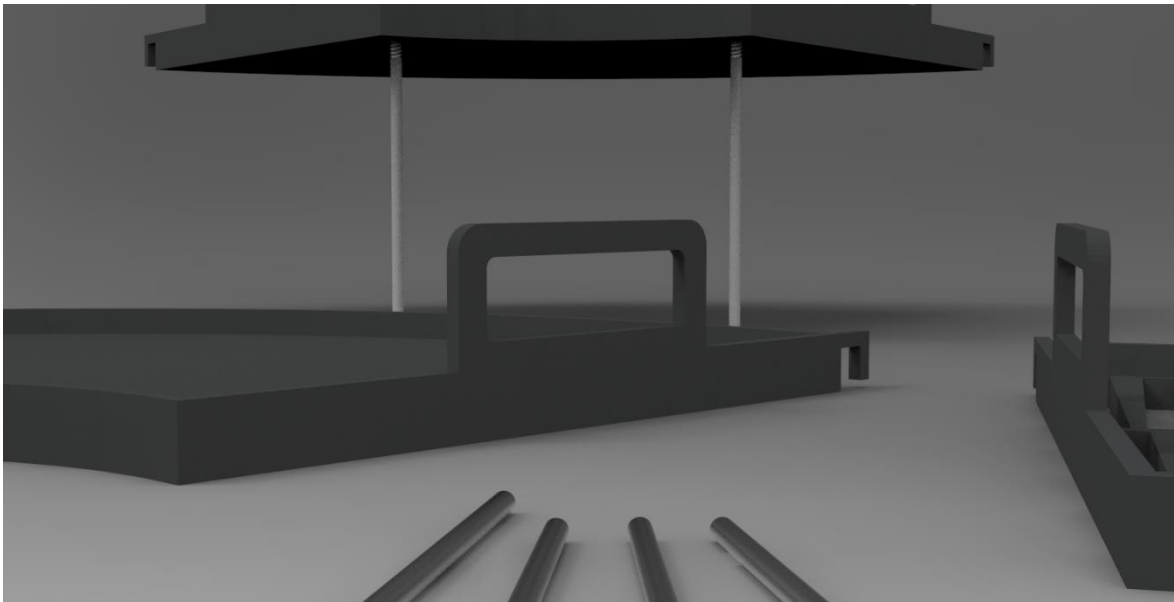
Closer view of the griddle and the shafts in SolidWorks
